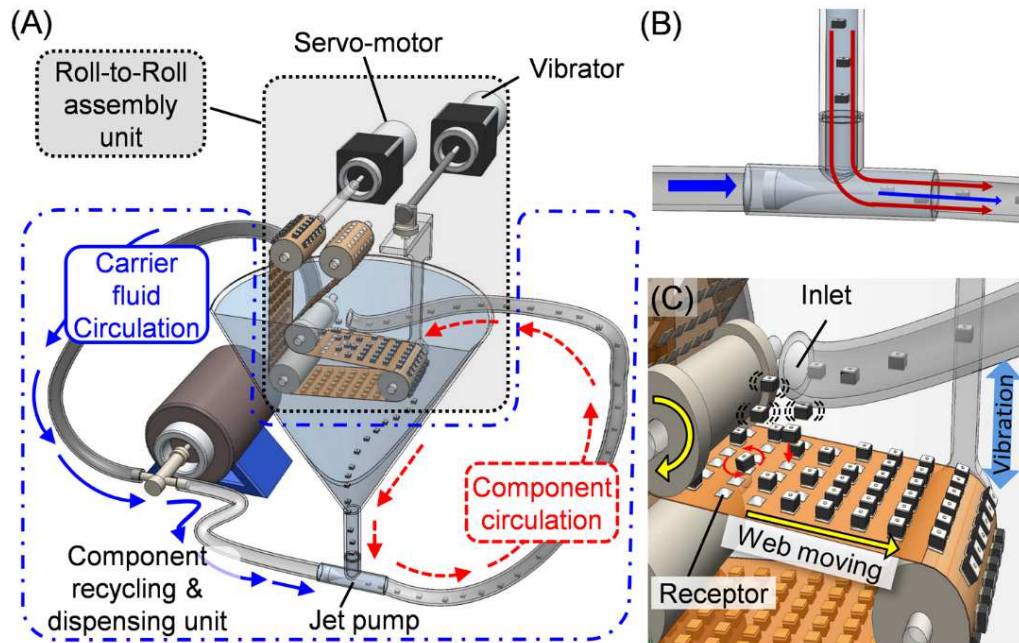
Automated Roll-to-Roll fluidic self-assembly process. (A) Overview illustrating component dispensing, fluidic self-assembly based on surface tension, and recycling of excess components. (B) Principle of jet pump. (C) Illustration of surface-tension driven self-assembly using molten-solder-based-receptor.
